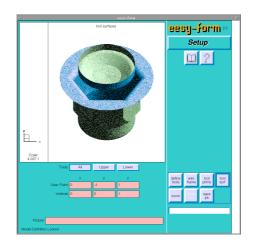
ref. Part: Tooling (tool surface - 3D view)
